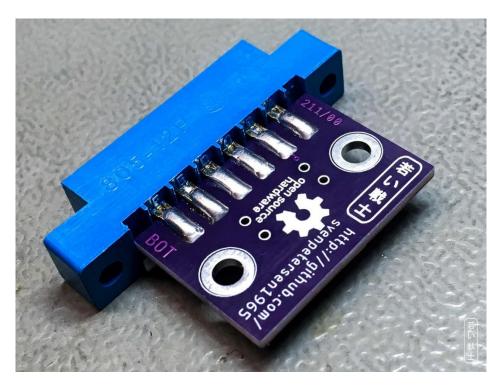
Step 1: Solder the bottom latches flat on the bottom side of the PCB
